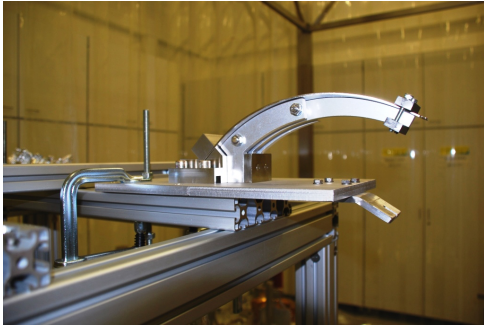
The bending tool is taken off the blade, while the clamp holds it in place.
